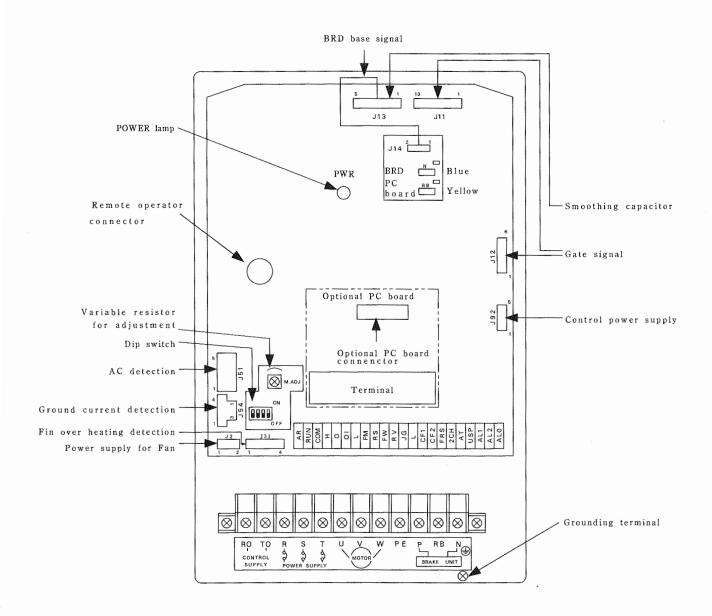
PC Board Layout Drawing (Example: 2.5LB2 to 5.5LB2)
